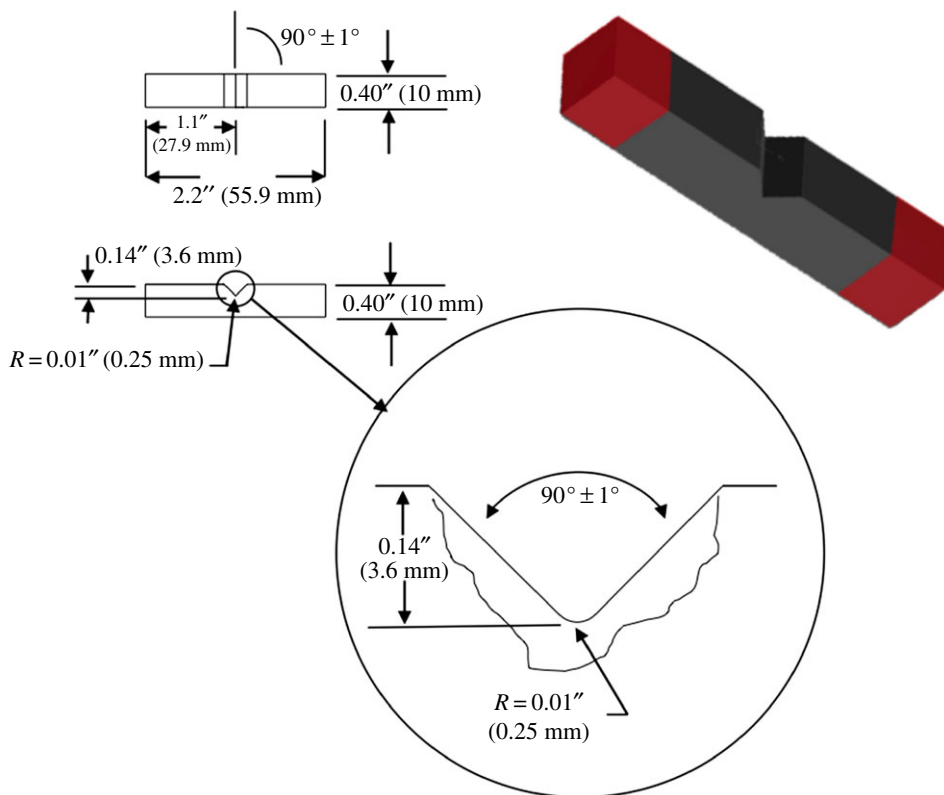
Dimensions of ASTM F519 (type 1e) single edge-notched bend square bar specimen. (Online version in colour.)
